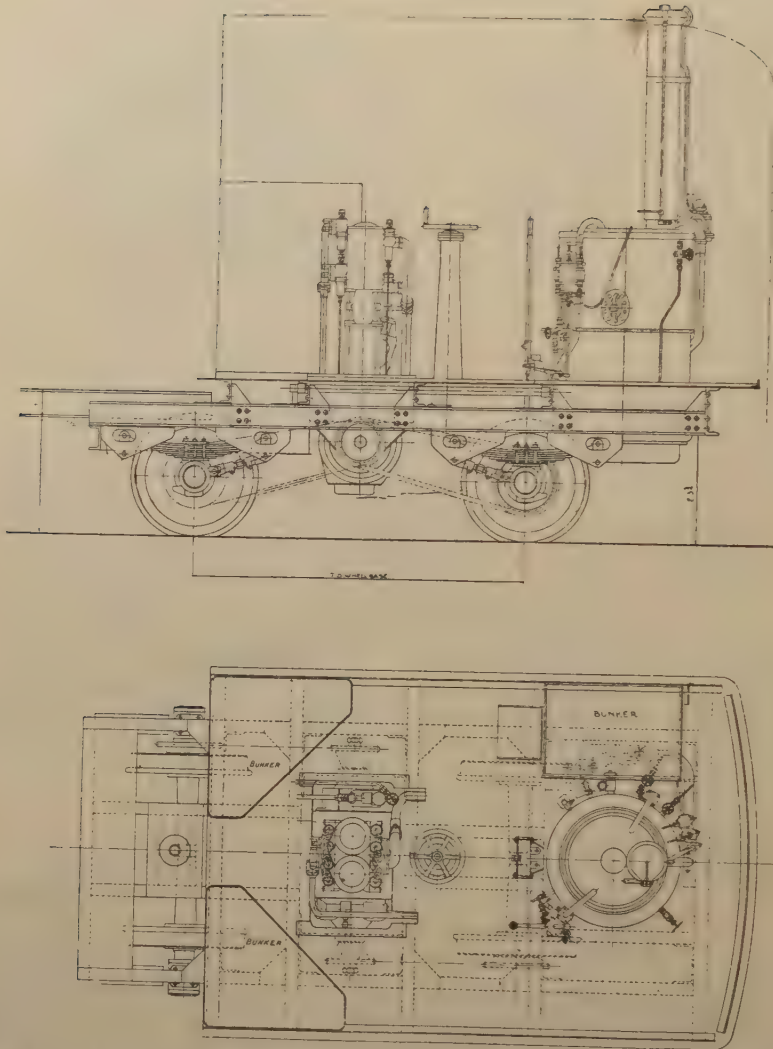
Arrangement of power unit, Sentinel Cammell steam rail car — chain driven.
